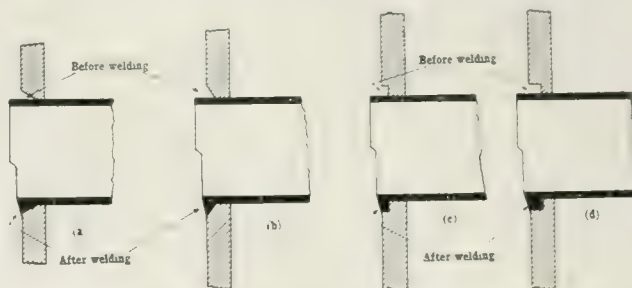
VARIOUS METHODS USED IN WELDING BOILER FLUES IN PLACE
